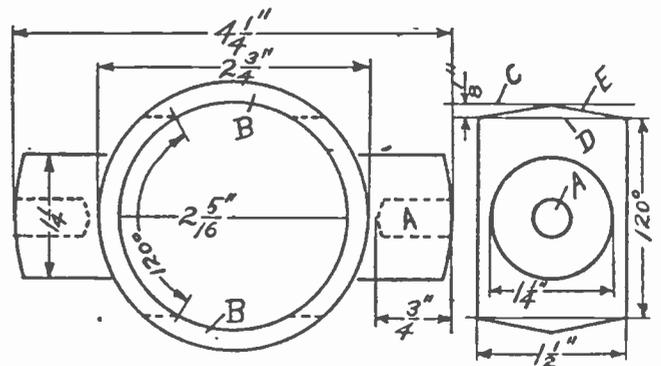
Casting for Two Pole Pieces and Magnet Cores.
